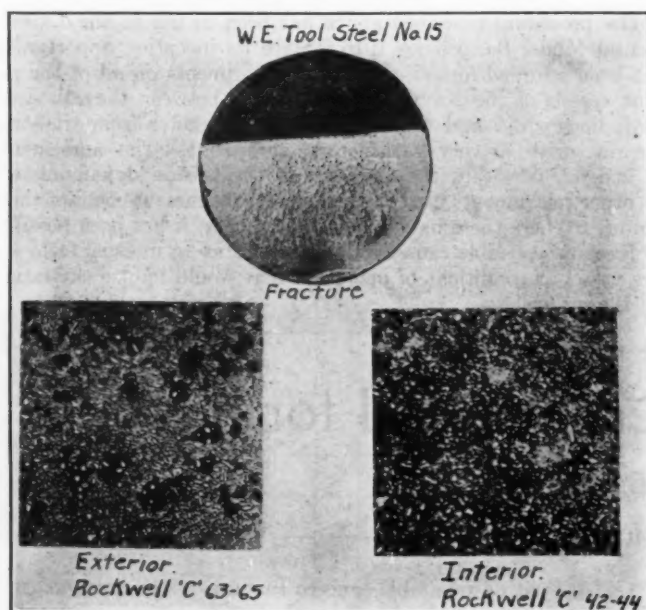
FRACTURE, MICROSTRUCTURE, AND ROCKWELL HARDNESS VALUES OF A CARBON TOOL STEEL
